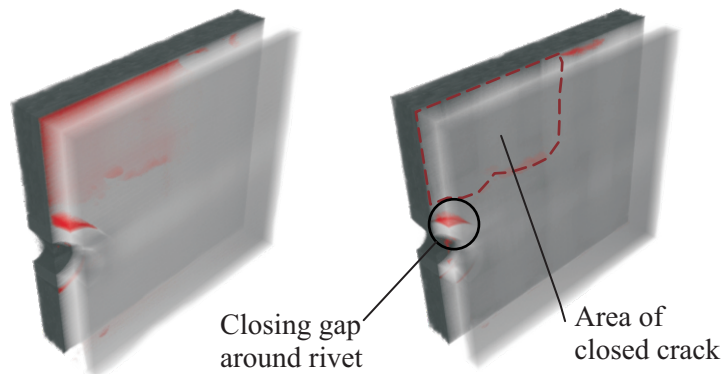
Detectable damage in the joining zone during a load stage and the subsequent unload stage
